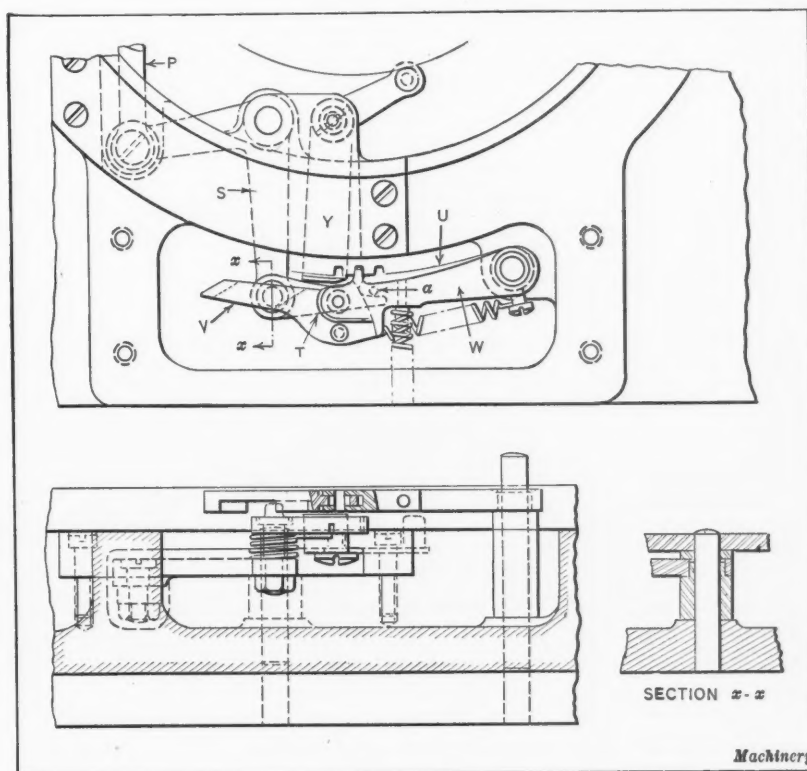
Arrangement of the Indexing Mechanism incorporated in the Slot Milling Machine shown in Fig. 1
